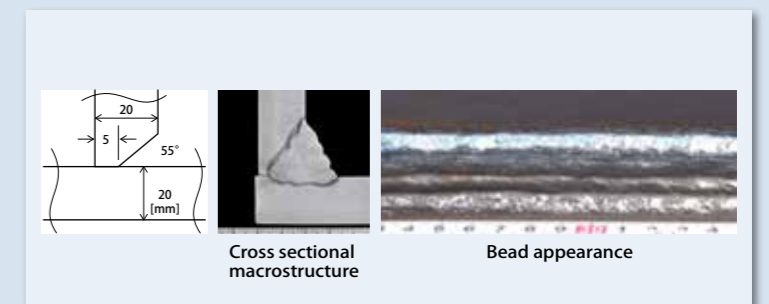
Bead appearance and cross sectional macrostructure in horizontal fillet welding at bevel angle 55°
